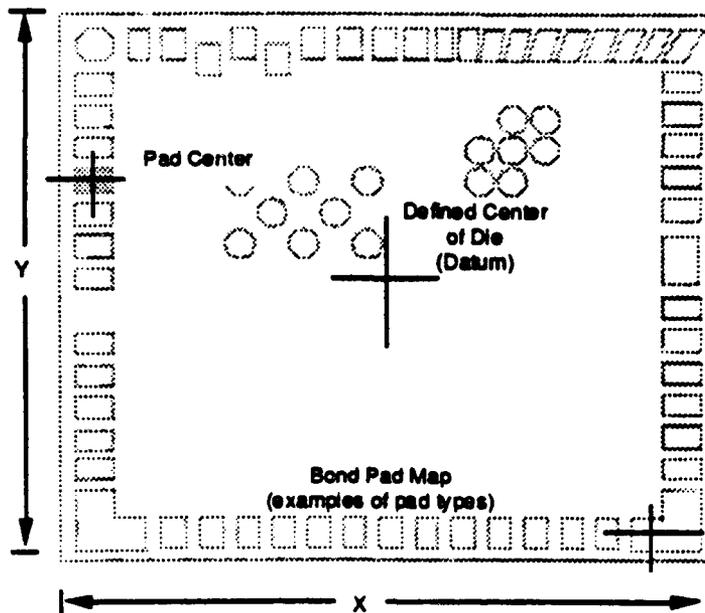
Die and Pad Datum (centers), Pad outline, and placement examples
